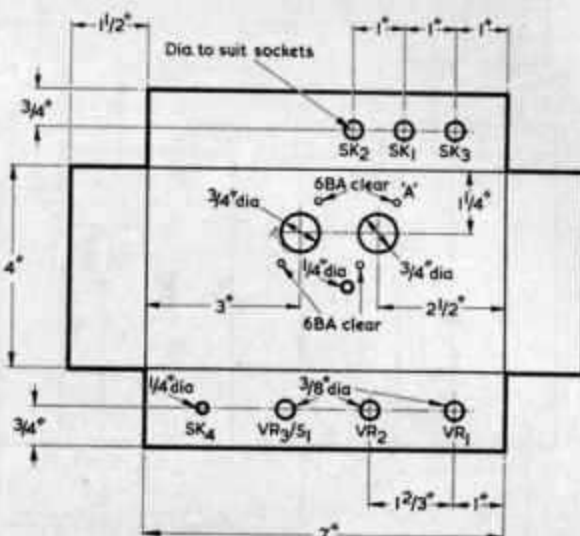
Top view of the chassis. The flanges are shown opened out for clarity
